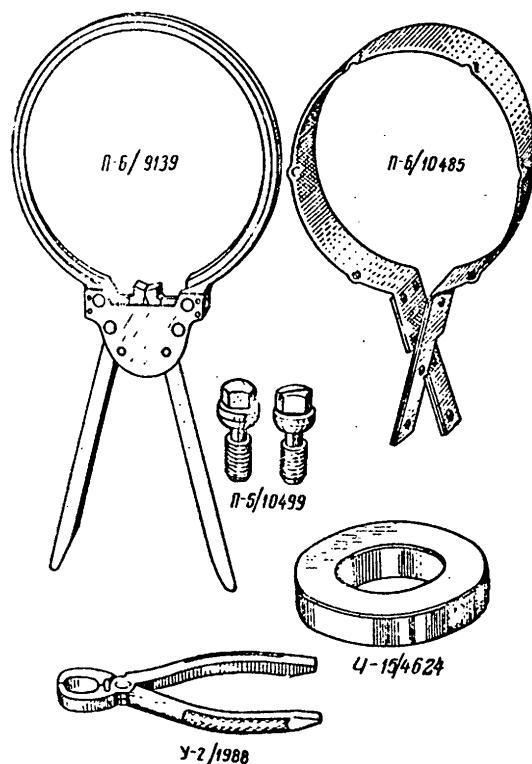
TOOLS AND FIXTURES FOR ASSEMBLY OF CYLINDERS AND PISTON
